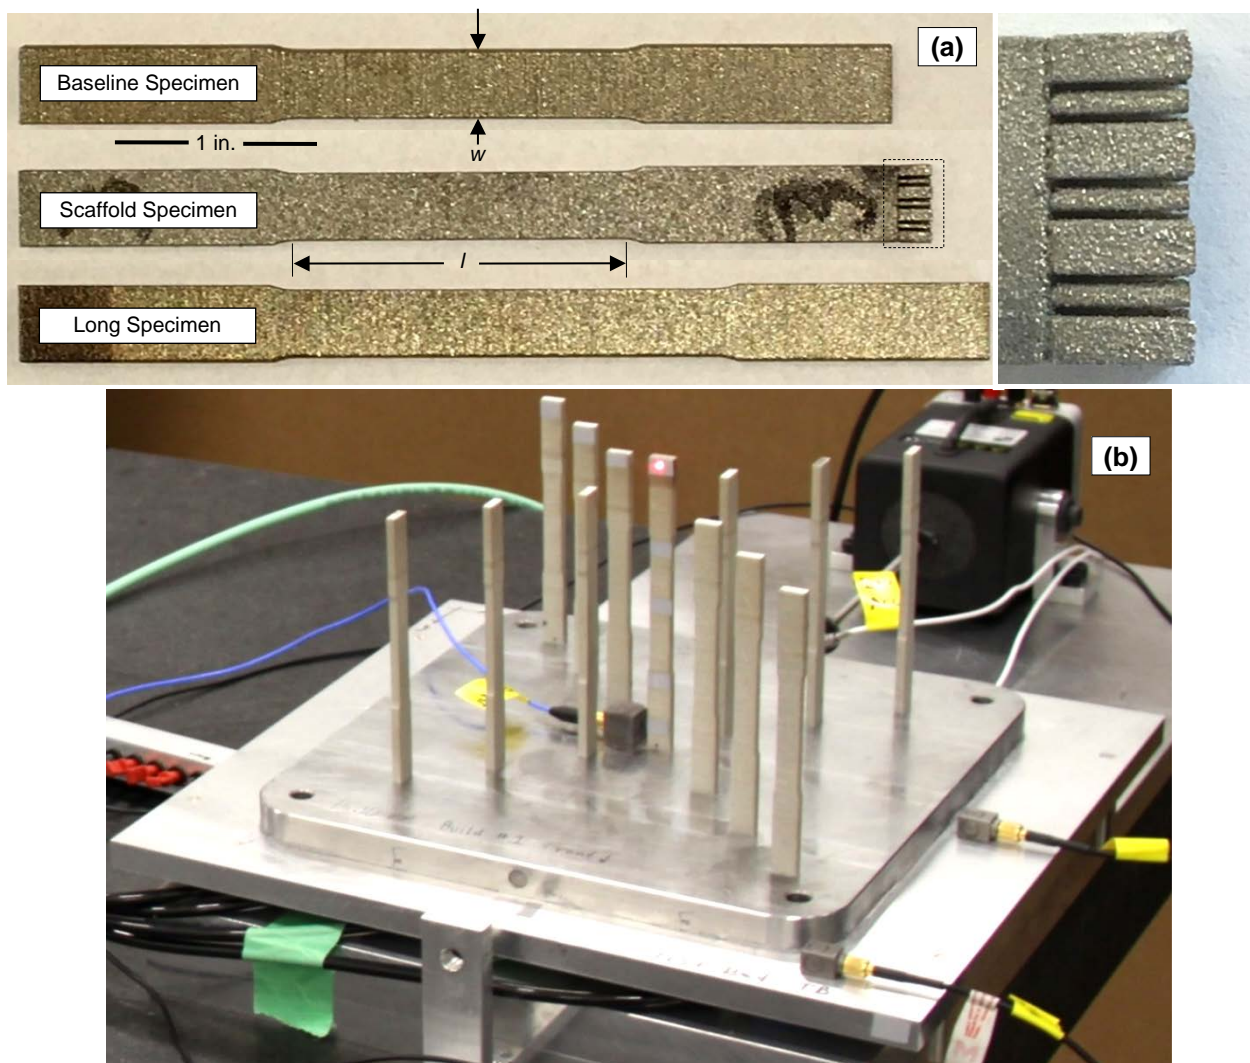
(a) Tensile specimens with expanded view of scaffold. (b) Photograph of a build plate on the shaker table.
